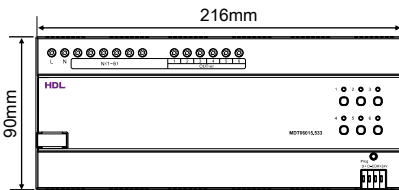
6CH 1.5A MOSFET Dimming Actuator
